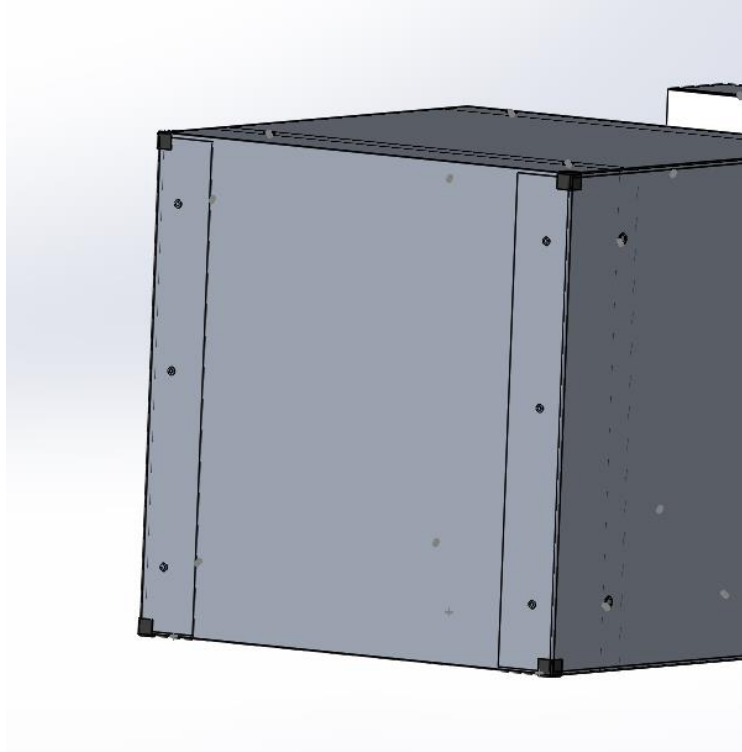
Back of the oven with the back plate inserted and fastened to the outer flanges
